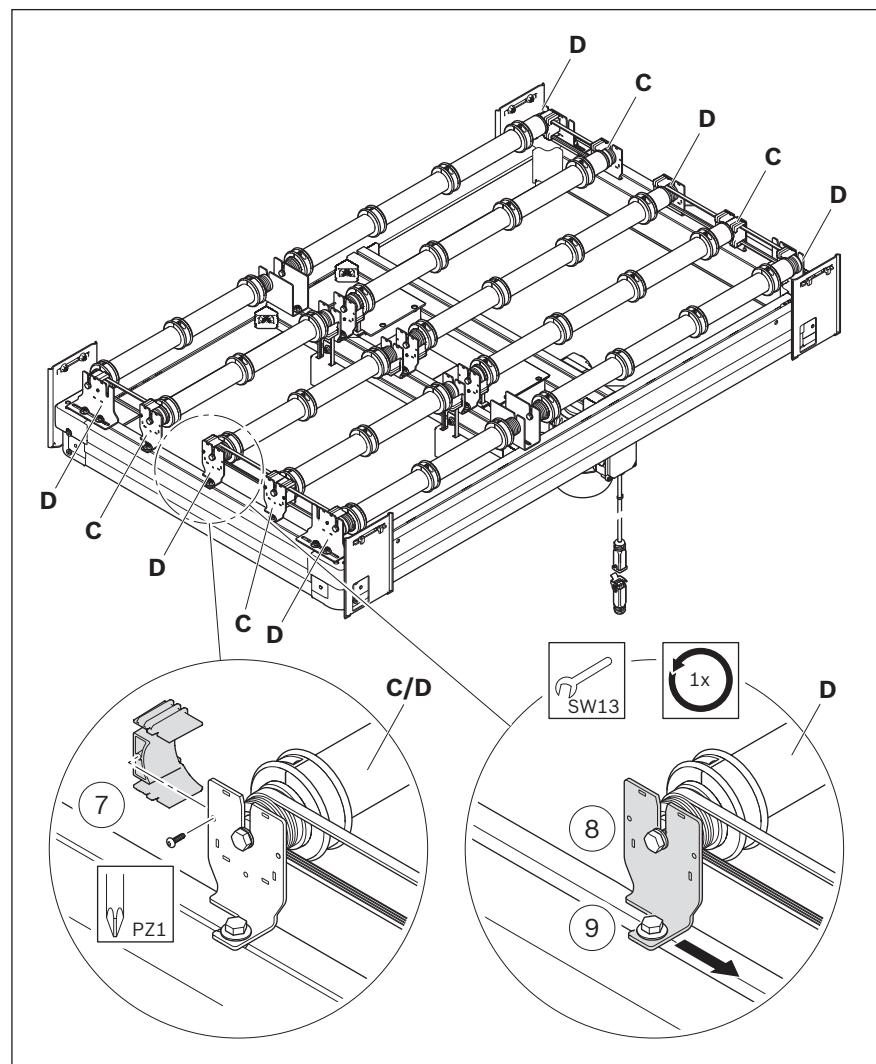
Exchanging toothed belts and/or multi V-belts, disassembly (2/3)
